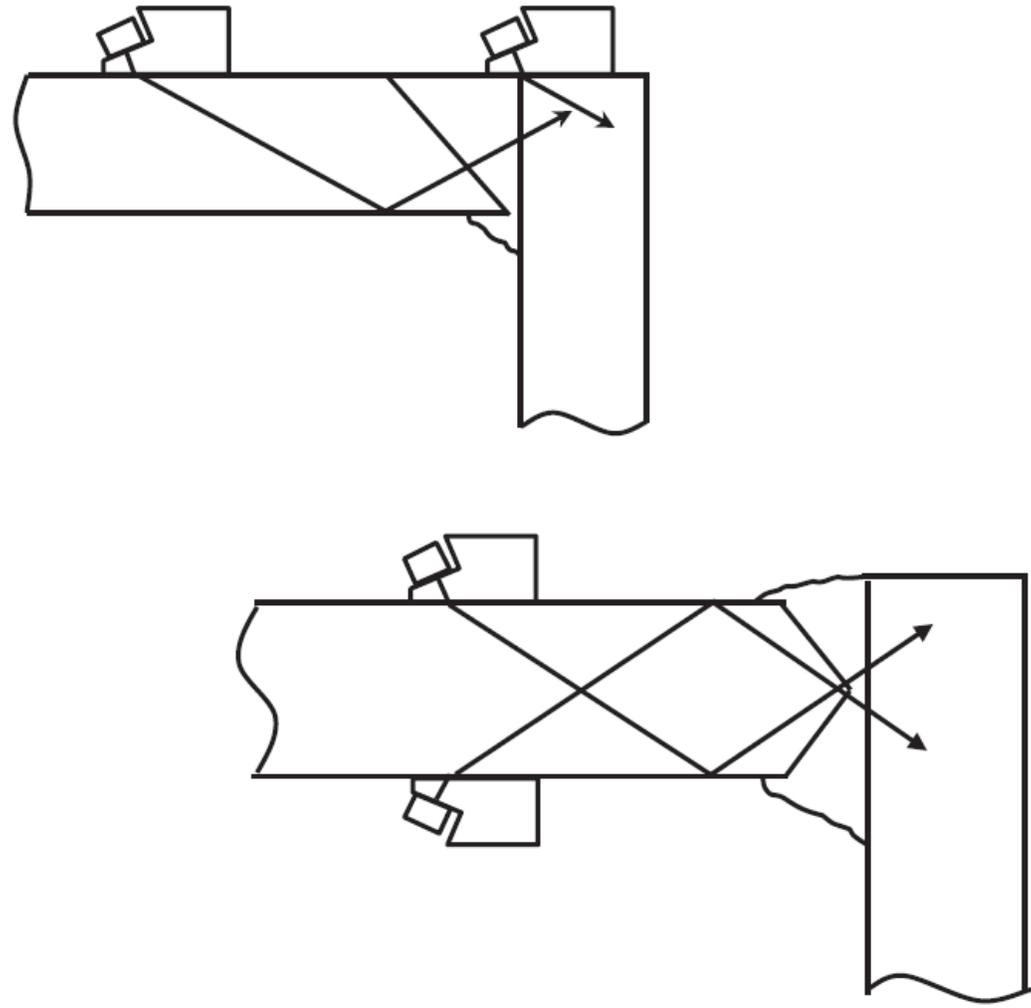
Example Scanning Techniques for Corner Welds.
